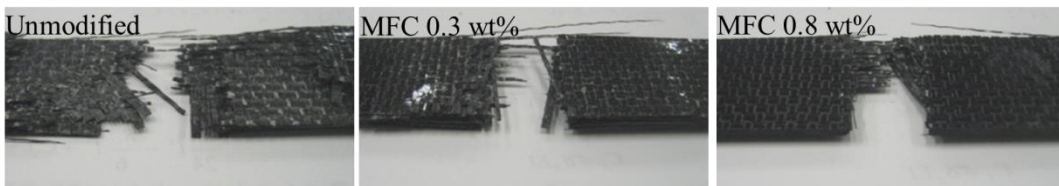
Fracture mode after fatigue failure of CF/EP/MFC composites
